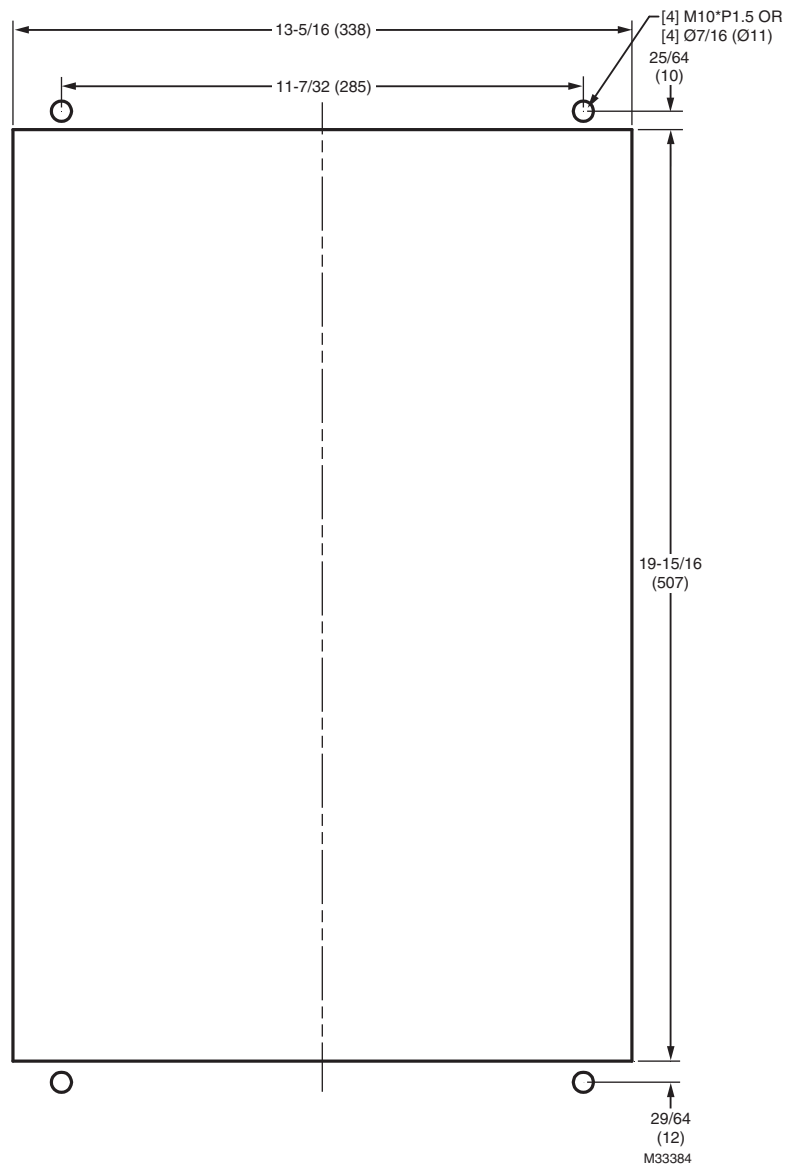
Panel Cutout Diagram Frame D: Unit in in. (mm)
